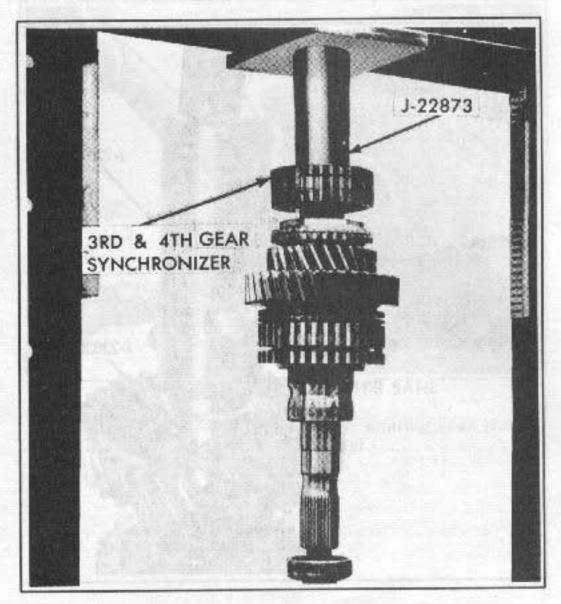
B-19L-Installing 3rd and 4th Gear Synchronizer
